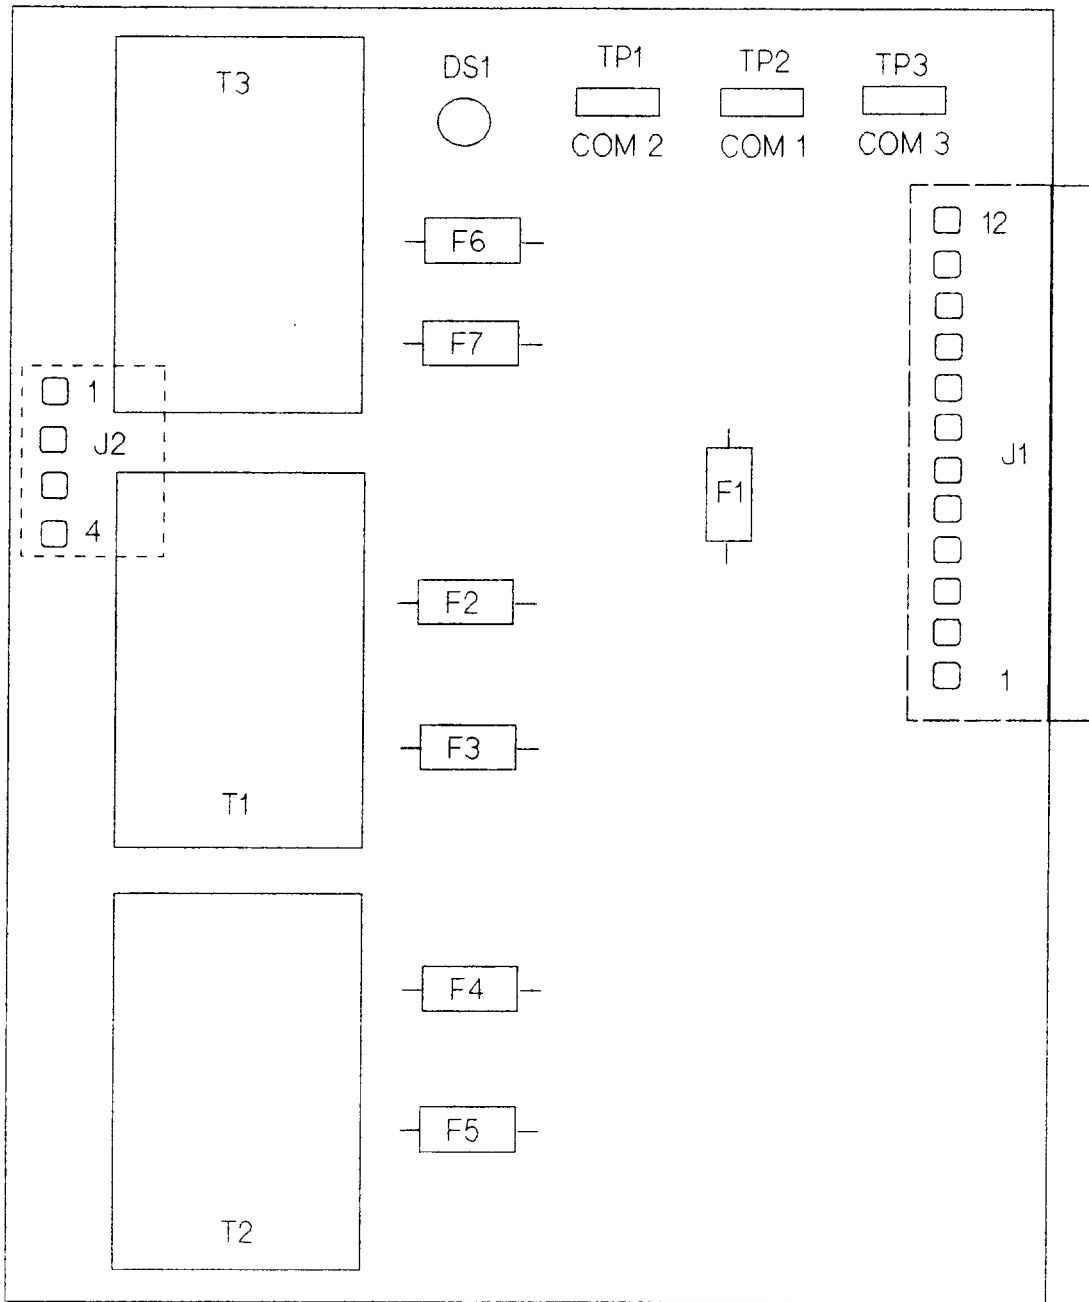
A10 Auxiliary Power Supply Assembly Schematic
